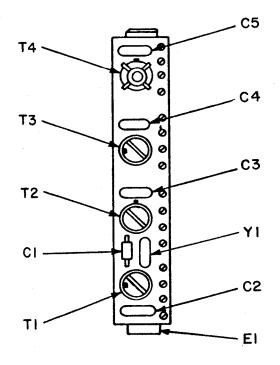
19 MHz Subassembly A2A4A9, Component Locations
